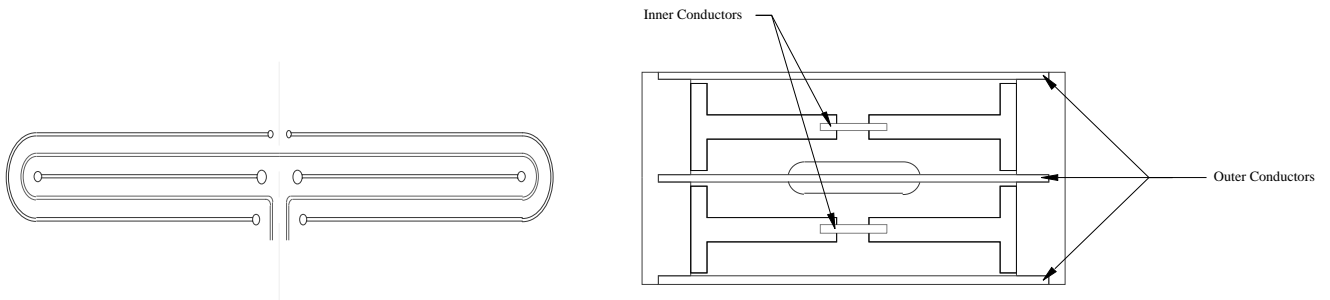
Cutaway side (left) and end (right) views of the mechanical drawings of the rectangular coax FWG.
